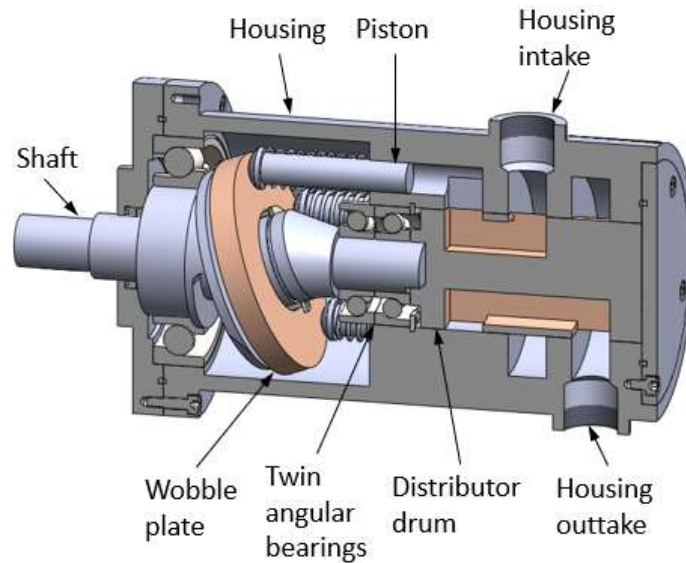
Section view of the wobble plate piston pump with labels identifying main components.
